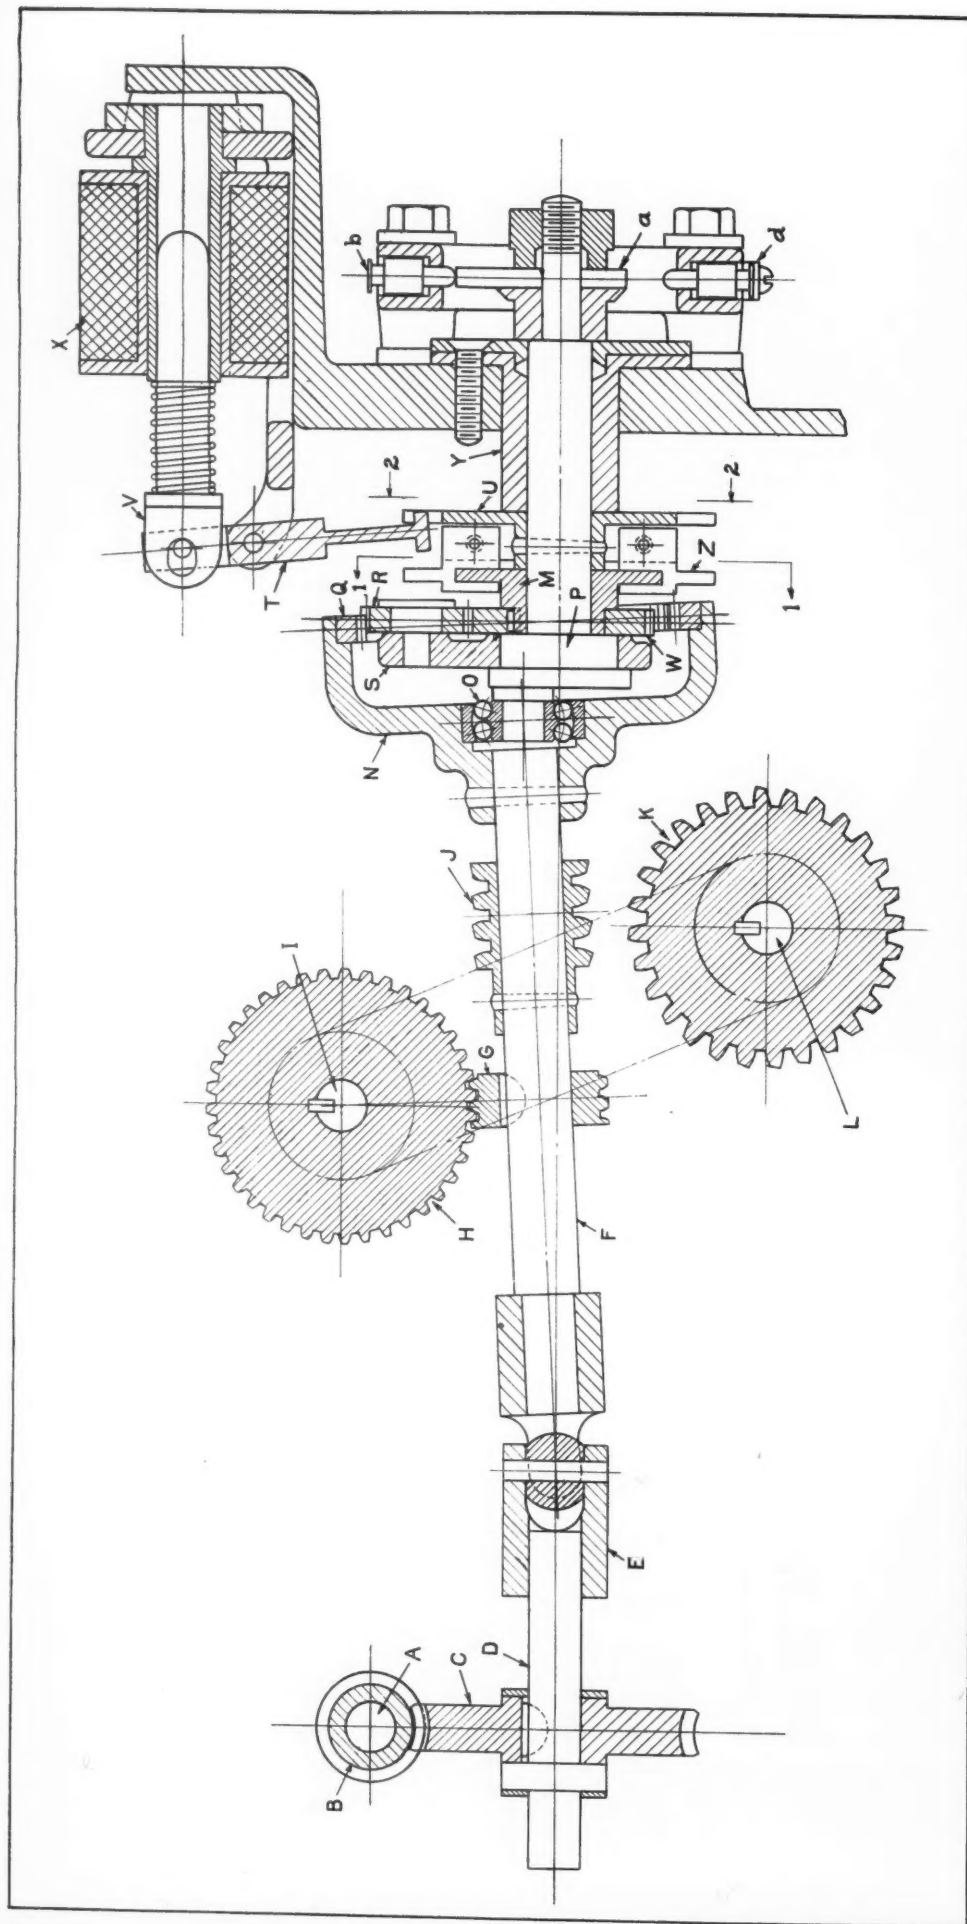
Sectional Side Elevation of the Gear Shift Mechanism, Reversed End for End in Comparison with Fig. 1
